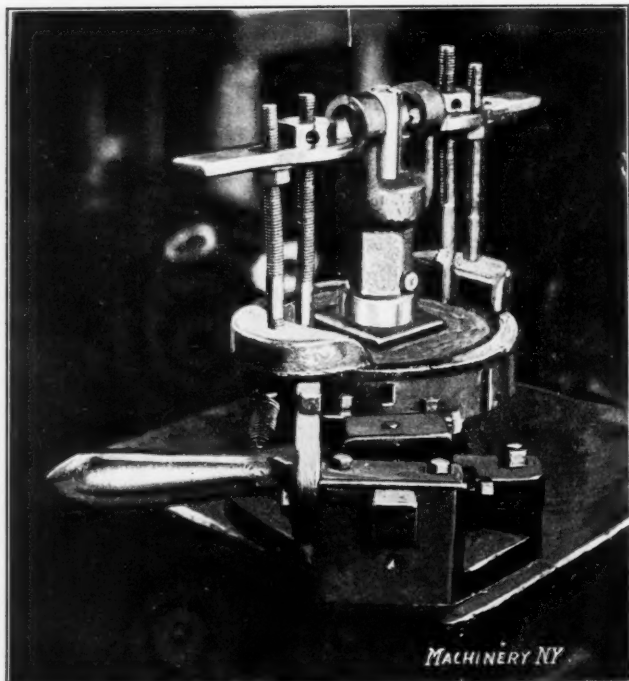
Indexing Fixture used on Keyseating Machine while Squaring Holes
